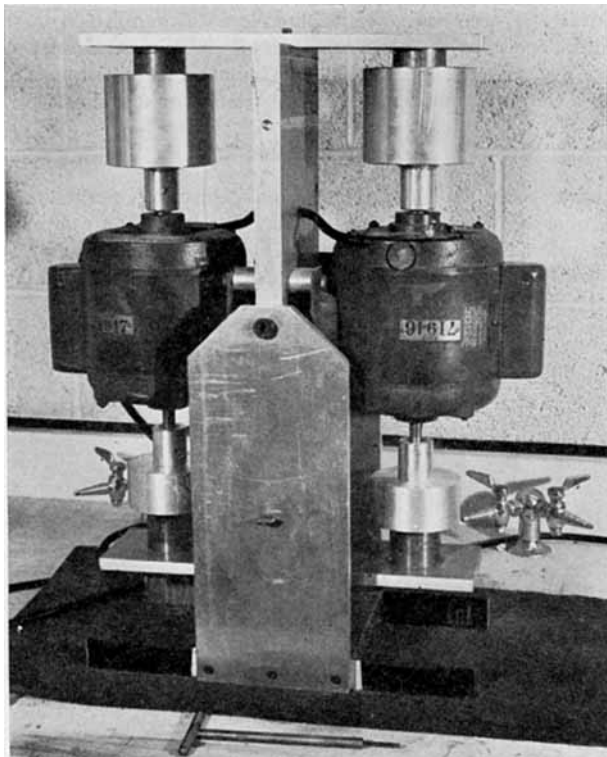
Photographic view of a four-cylinder spin casting unit.
